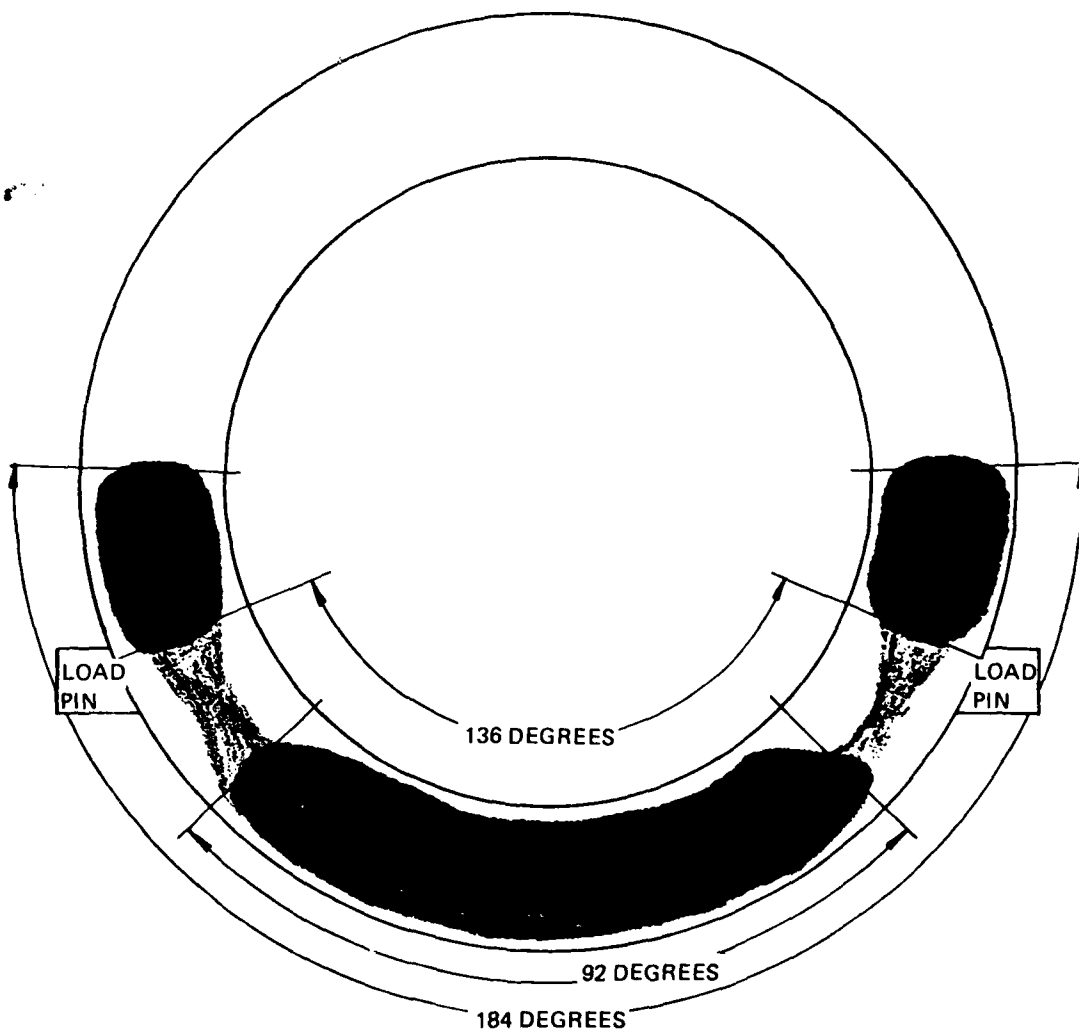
Load Zone of Opposite-Drive-End Slave Bearing Cup After Start of Test Setup No. 3.
